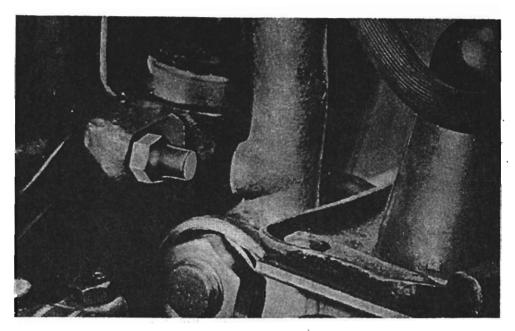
When Assembling Front Brake Support Plate, Install Retaining Screw with Raised Head in Plate Lower Rear Hole.
